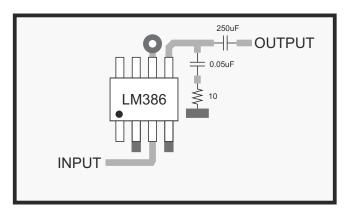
Layout Example for Minimum Parts Gain = 20 dB on SOIC package
